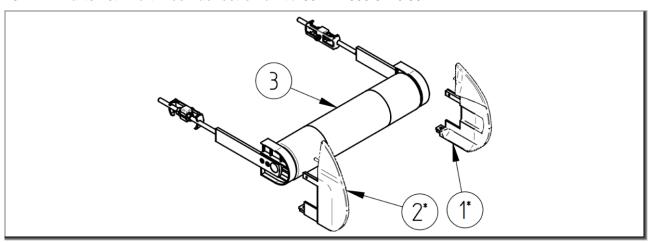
Parts list: Multi-Tech deflection unit Ø80- ZZ.800.0216.00
